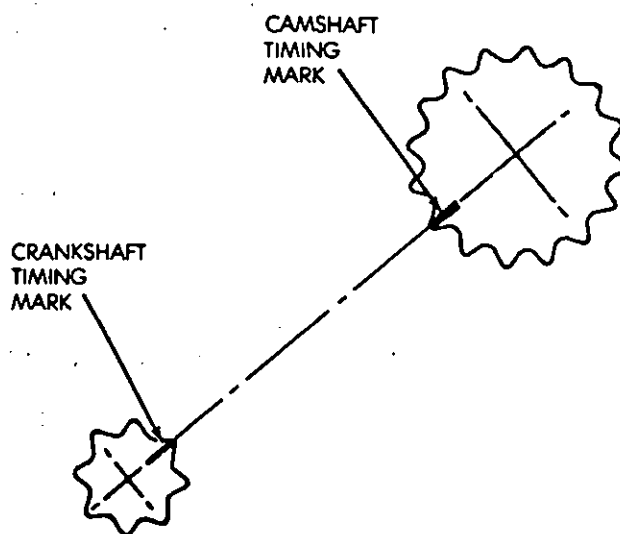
Right Camshaft/Crankshaft Timing Mark Alignment
